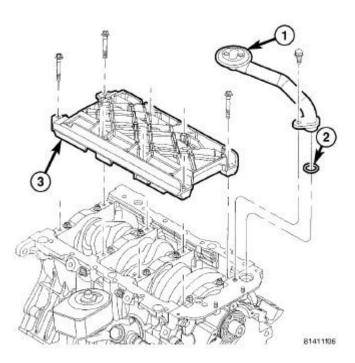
Oil Pick Up Tube, Seal & Windage Tray Courtesy of CHRYSLER LLC
